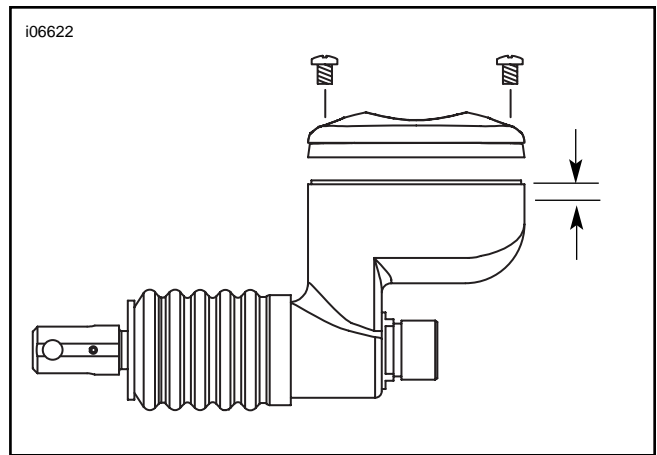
Fill 1/8 in. (3.2 mm) below Reservoir Gasket Surface (Softail and Dyna)
